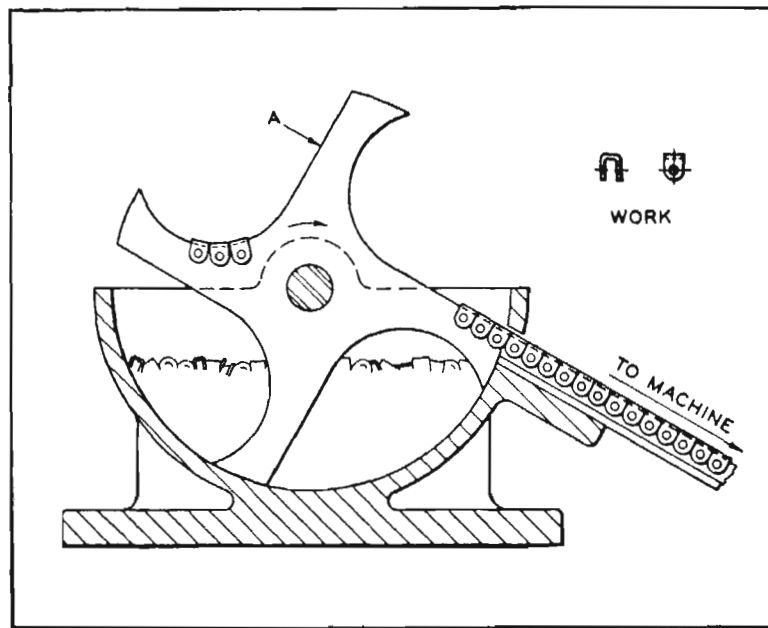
Rotary Centerboard Hopper for Feeding Channel-shaped Parts to Automatic Machines.
